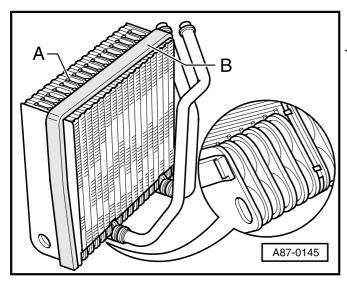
Attaching gasket to refrigerant lines of evaporator
